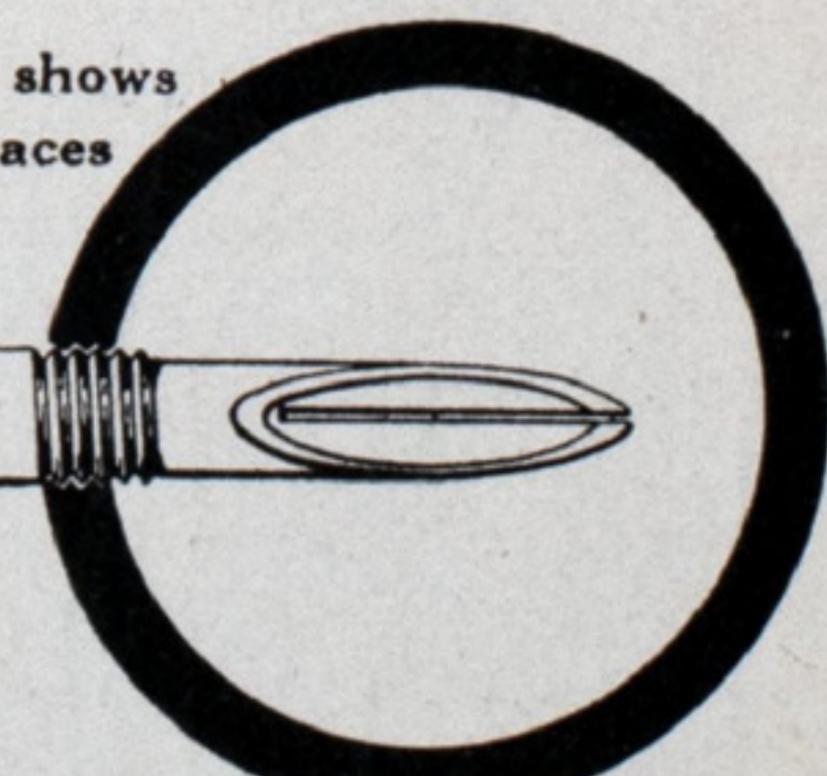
Double type piston ring, with spiral spring to produce expansion
